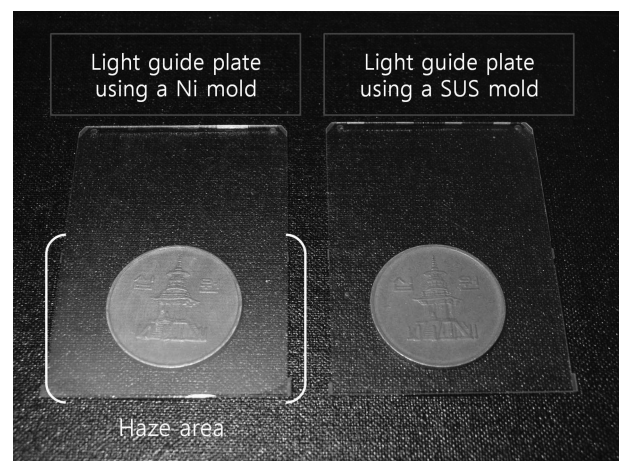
Photograph of injection-molded light guide plates made using the Ni and SUS molds.
